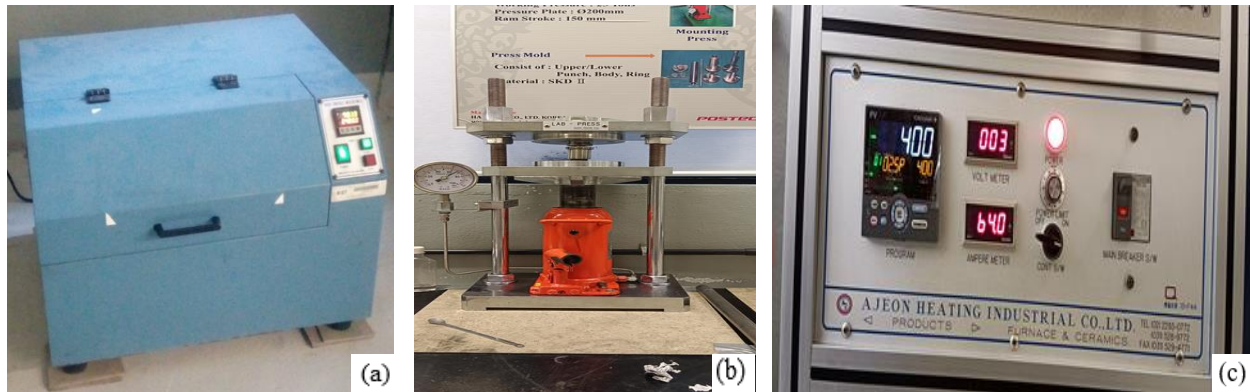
Ball milling, hydraulic press, and sintering equipment used during manufacturing.
